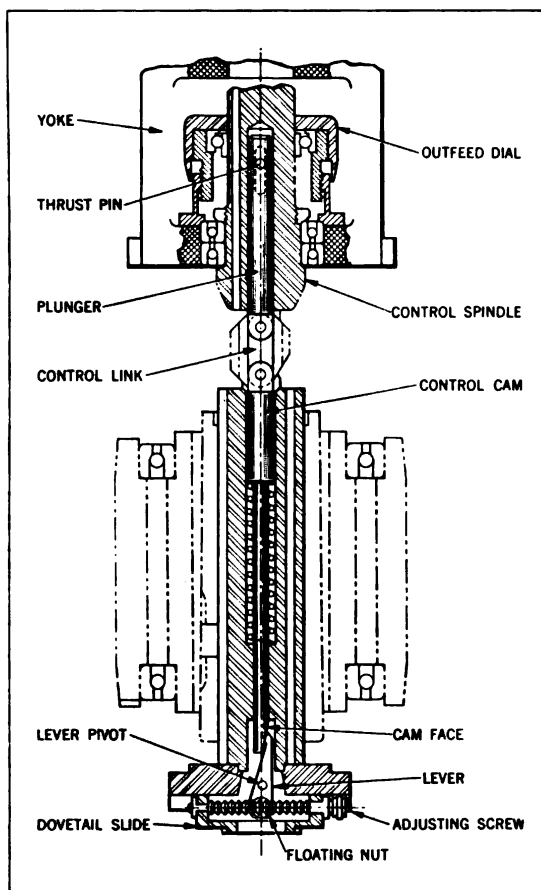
Assembly for controlling size by outfeed while grinding. Dial setting outfeed is graduated in "tenths."
